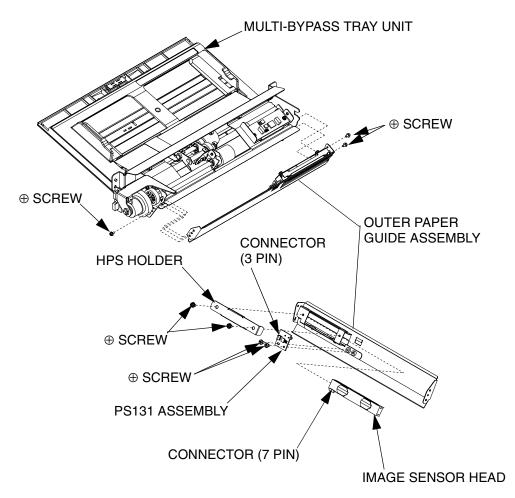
Removal of the H.POS. Sensor (Image Sensor Head) :For Front Engine
